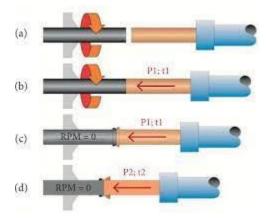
Phases of conventional friction welding process. (A) Period of approximation; (B) P1, t1 application; (C) end of P1, t1 application, and braking of the machine (RPM = 0); (D) P2, t2 application and finish welding
